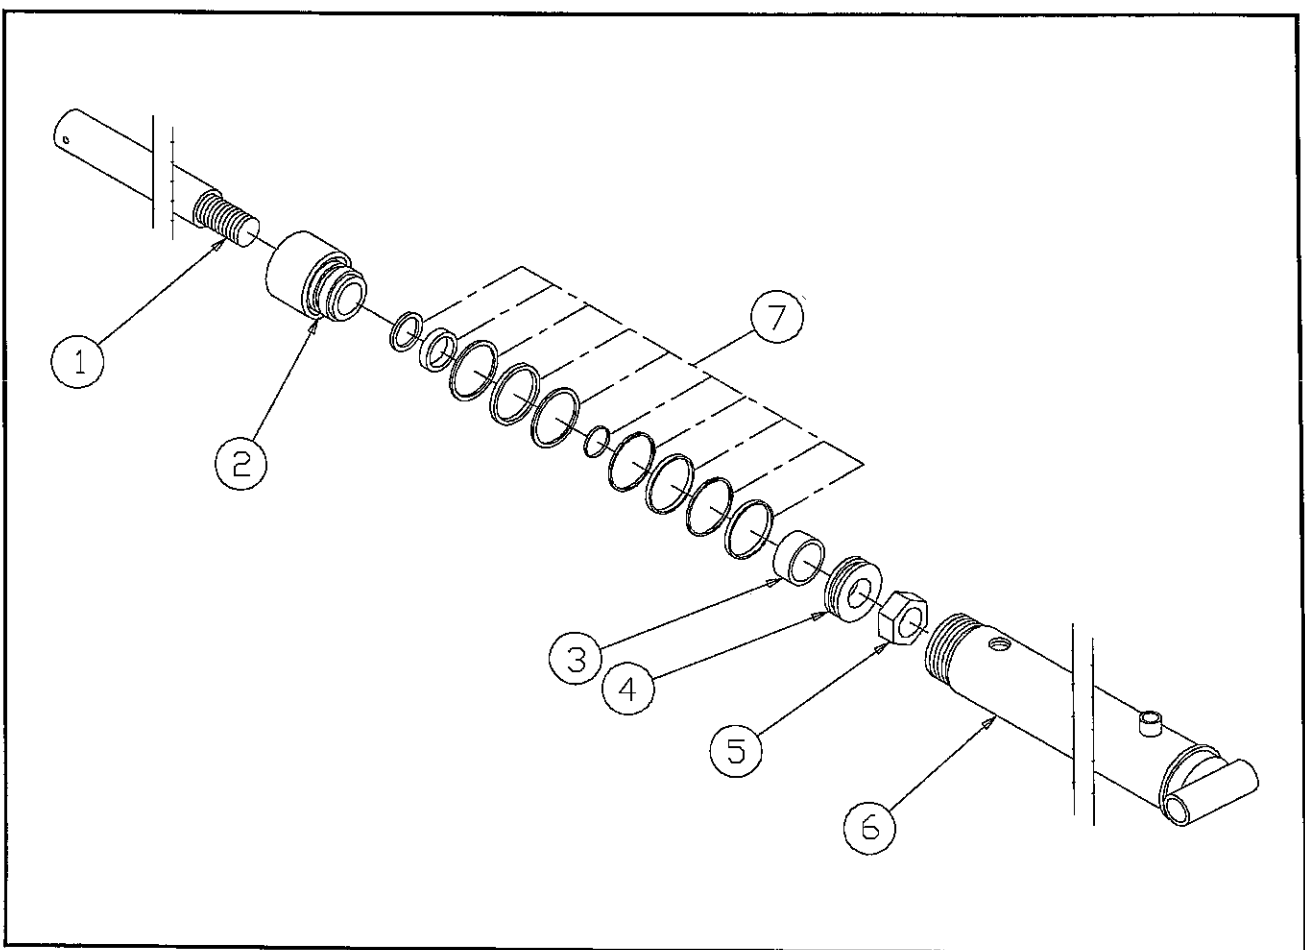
LOW LOAD ANGLE CYLINDER
